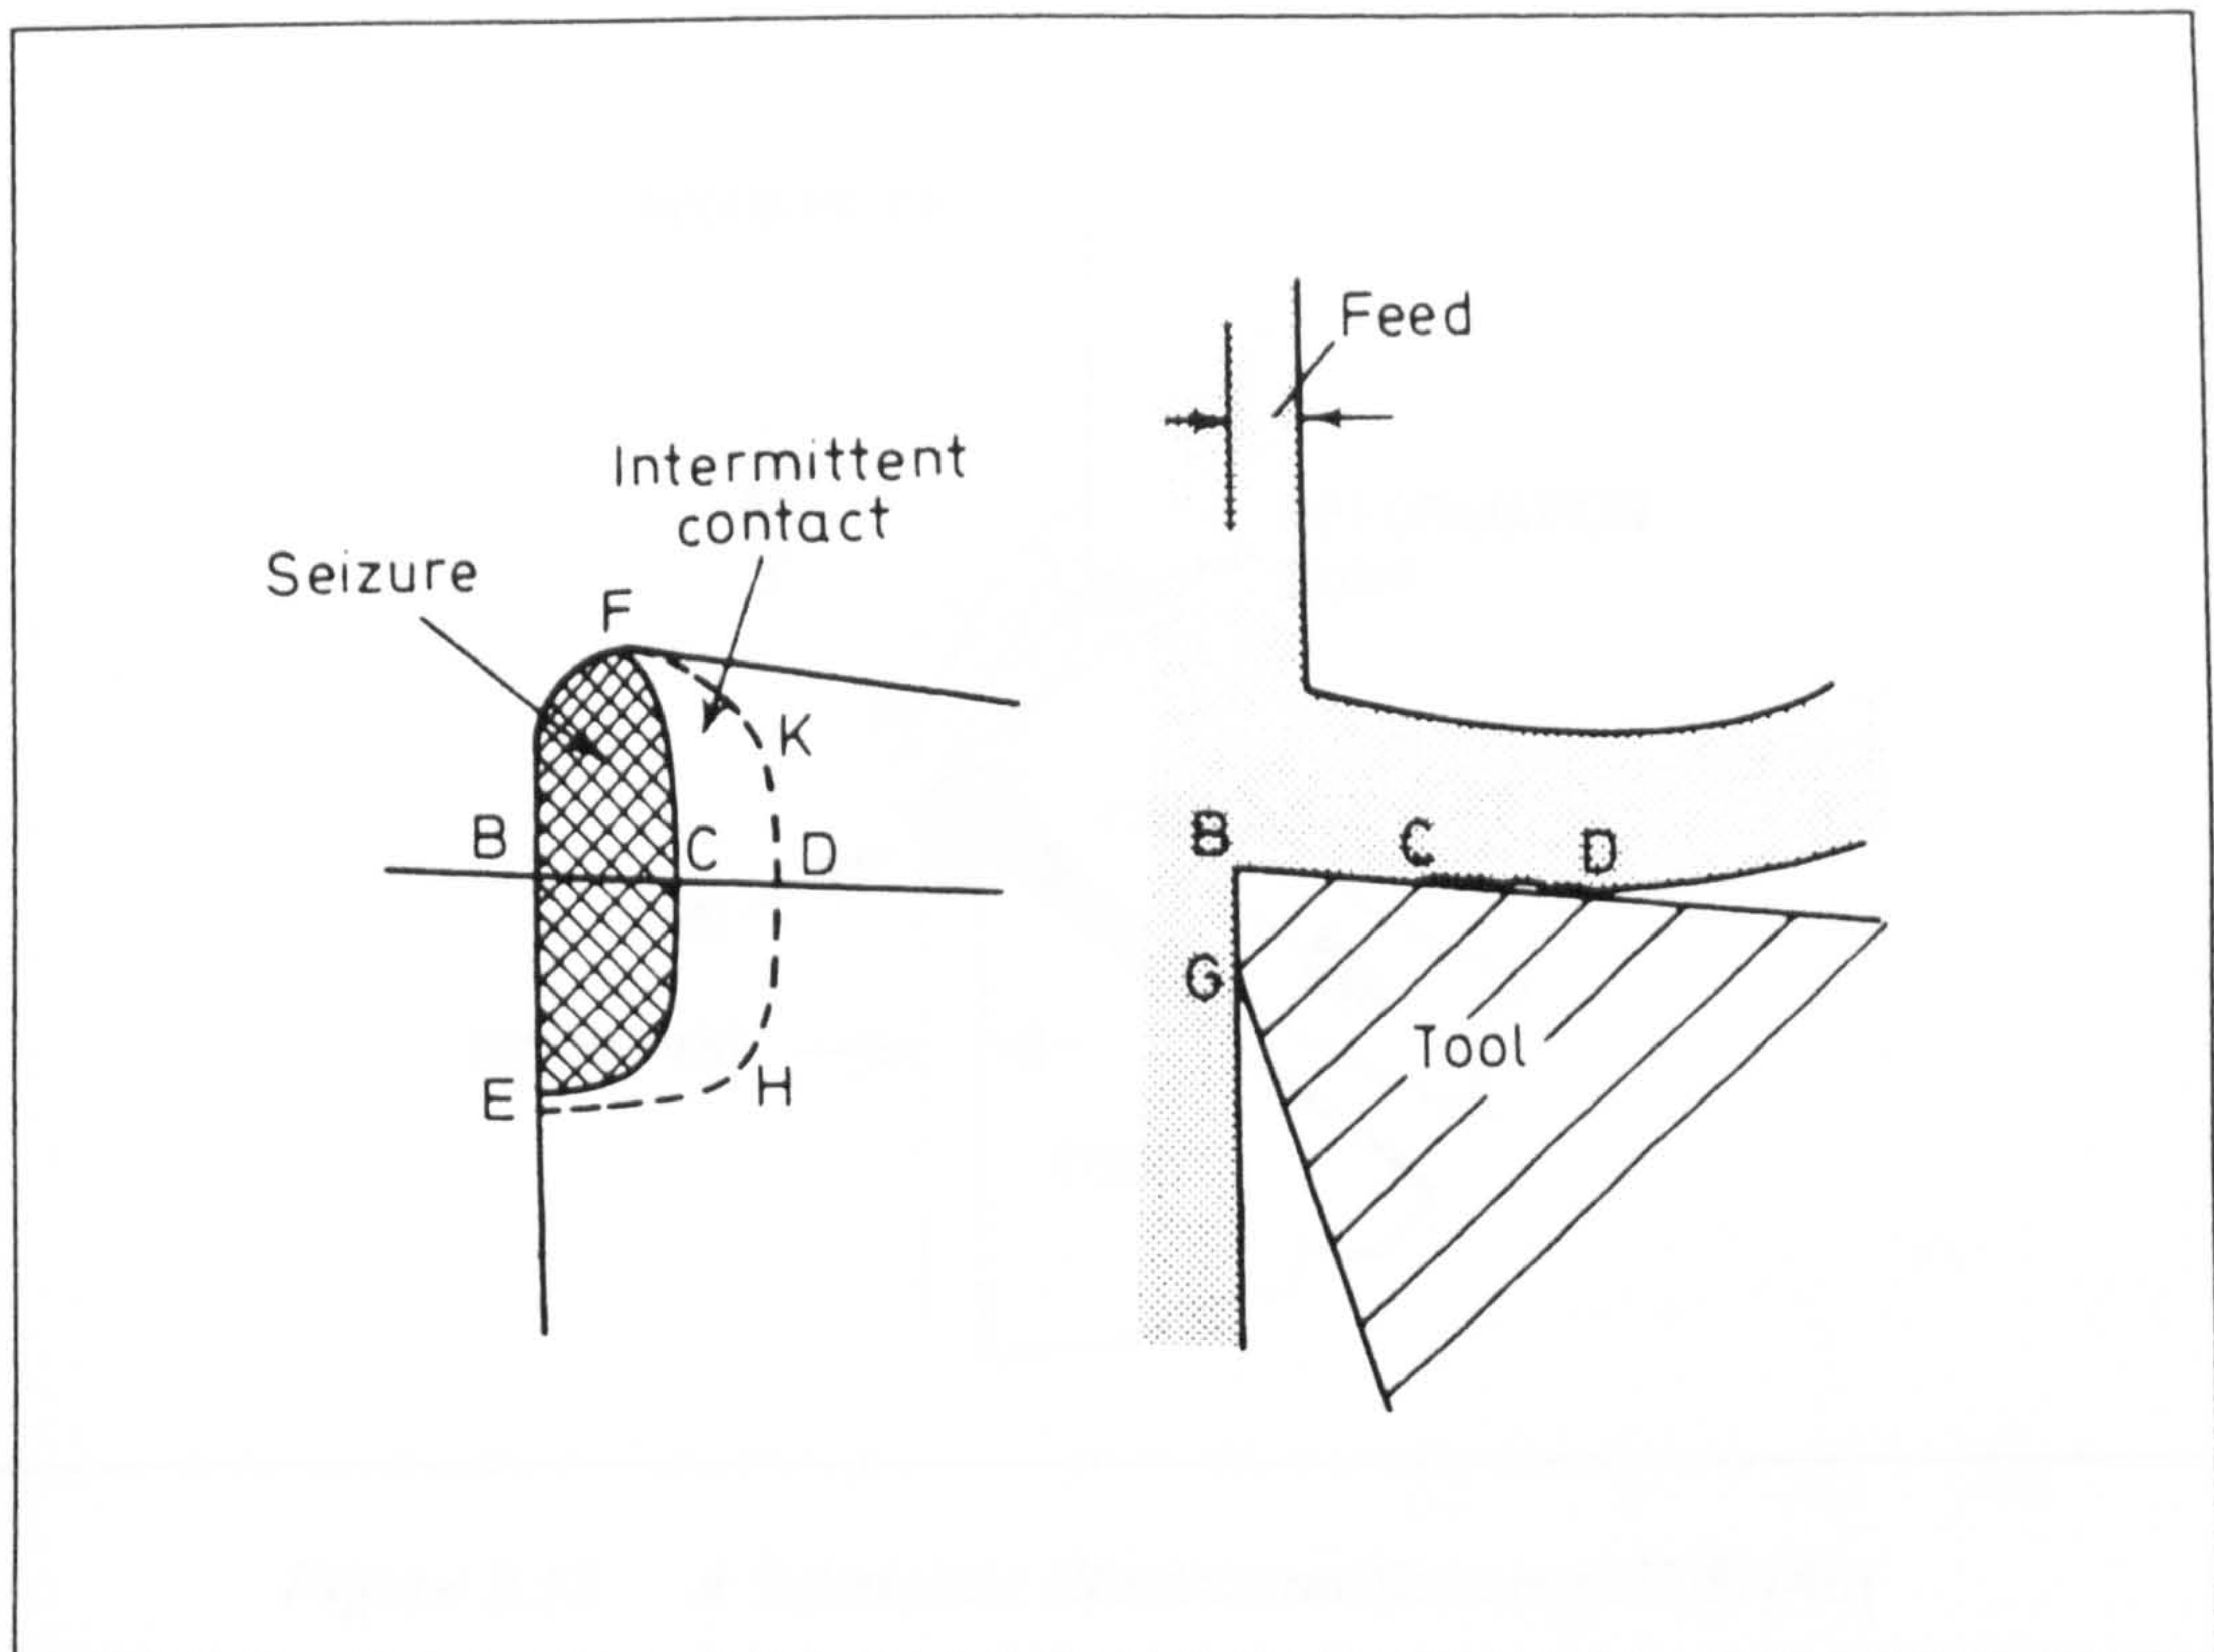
Areas Of Seizure On A Cutting Tool [13]
